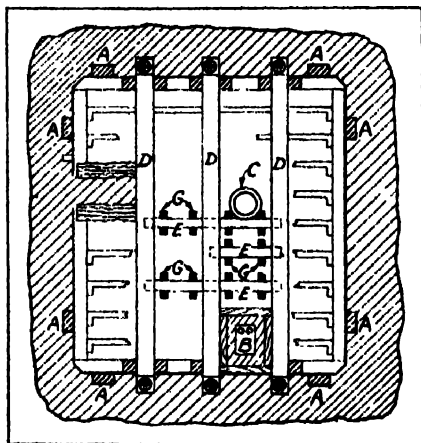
TOP VIEW OF THE MOLD SHOWING BINDERS, GATE AND RISERS
